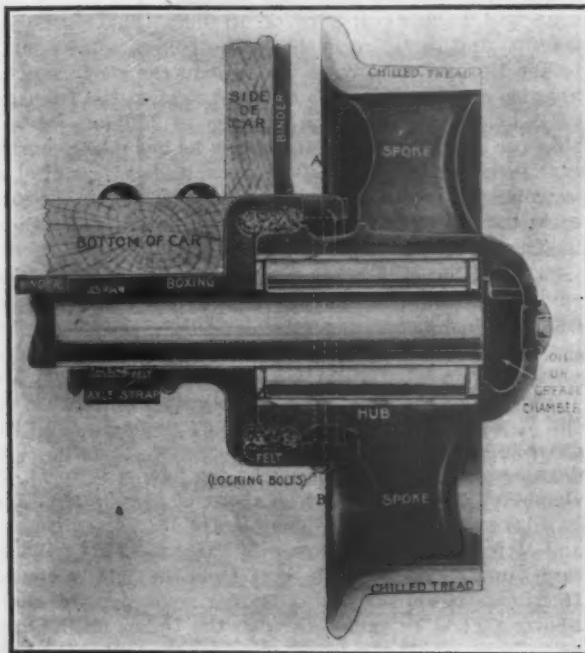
Axial Section of the Whitney Roller Bearing Wheel Made by the Sanford-Day Iron Works, Knoxville, Tenn.
